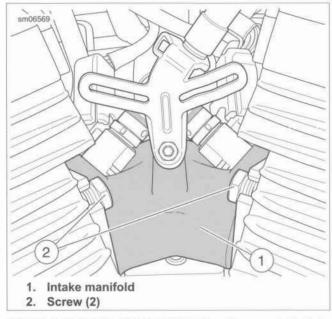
Intake Manifold Mounting Screws: Left Side
